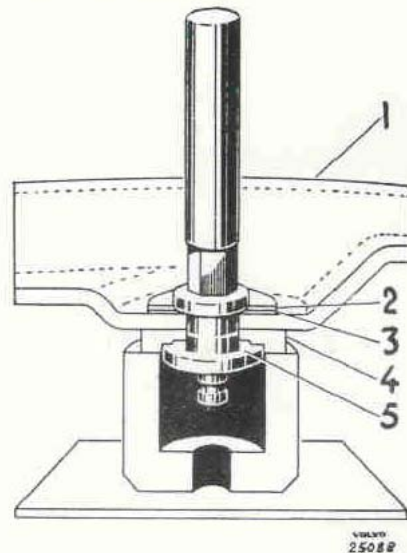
Removing the pin (rear shoe of rear wheel brake unit).
